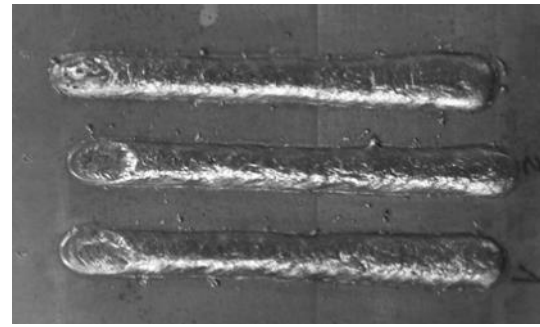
Weld beads obtained by local cavity method
